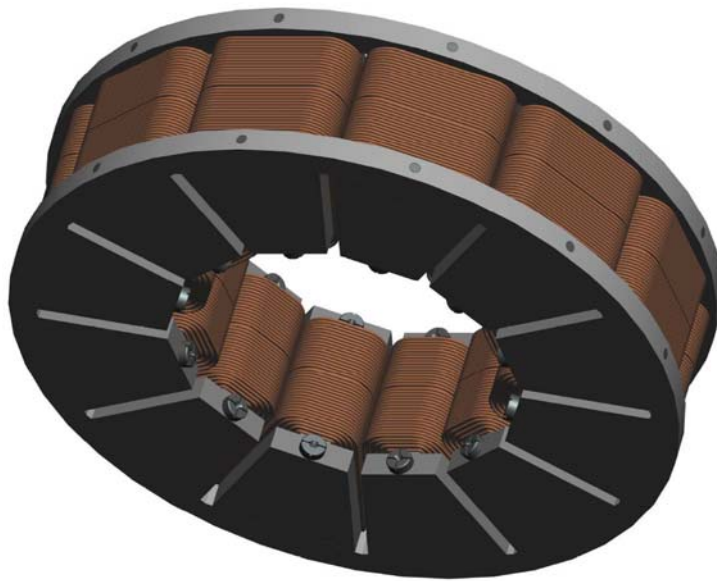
Assembled stator drawing for AFPM SAT machine.
